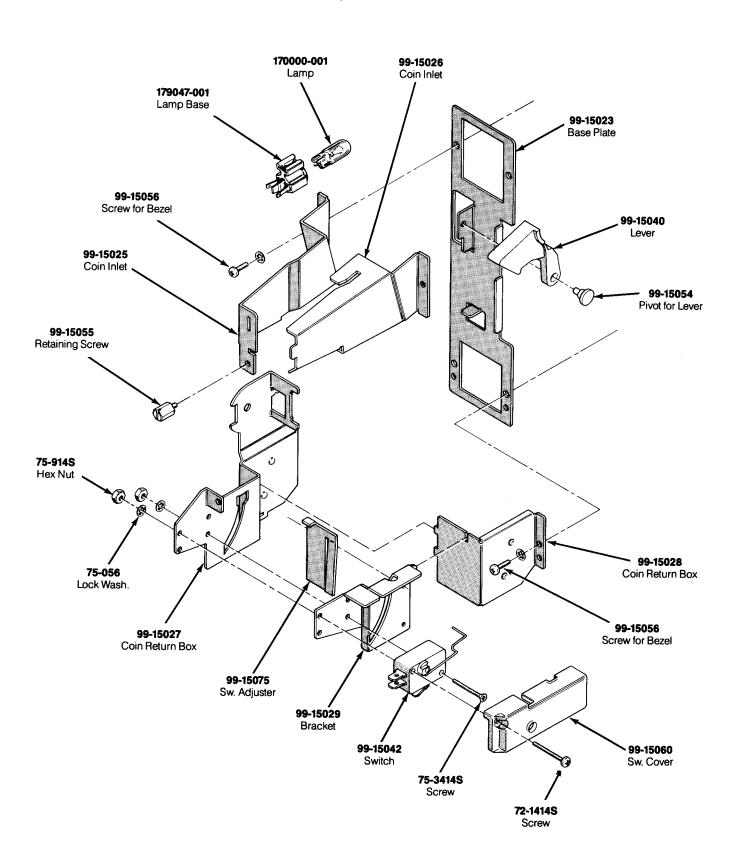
Coin Controls, Inc. Coin Door Assembly 171034-xxx A
